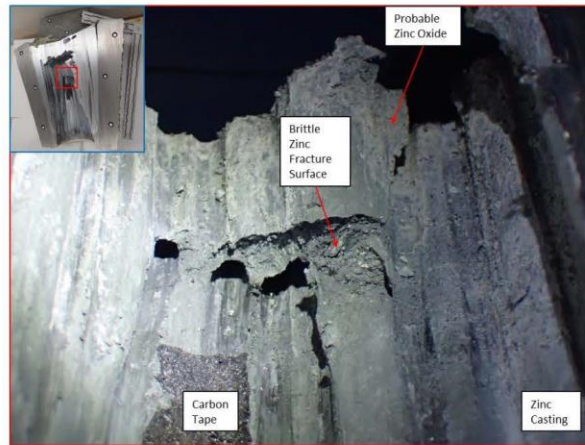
Close up view of slice 9c, within the socket cavity near the casting cap side of the slice, where some of the zinc between wires shows a brittle fracture surface. The wire channels in this image also appear to show a significant amount of corrosion product, most likely zinc oxide, on their surface. The black rectangular piece at the bottom left of the image is remnant carbon tape from chemical sampling.
